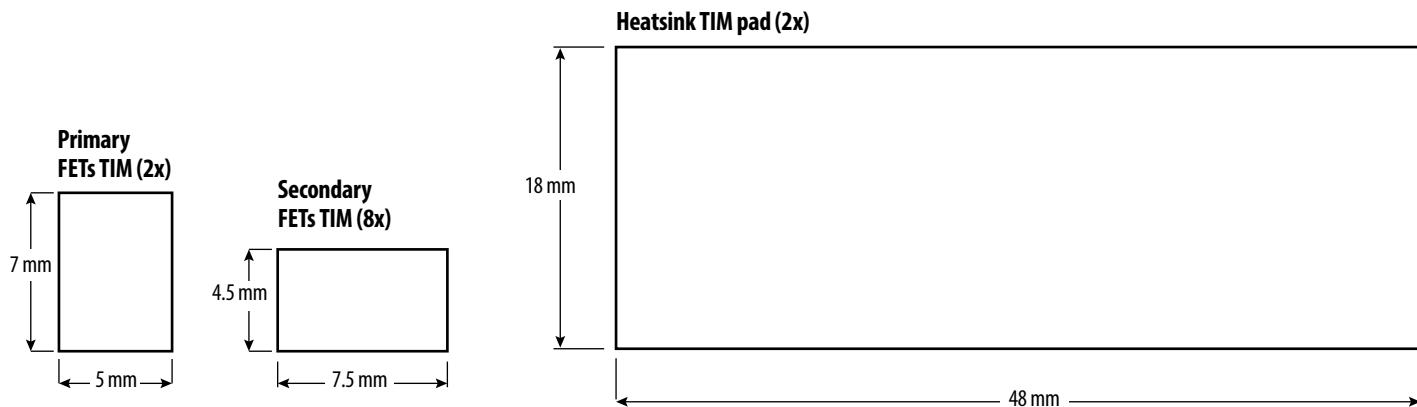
Drawings and dimensions of TIM pad cutouts for primary FETs, secondary FETs and heatsinks.
